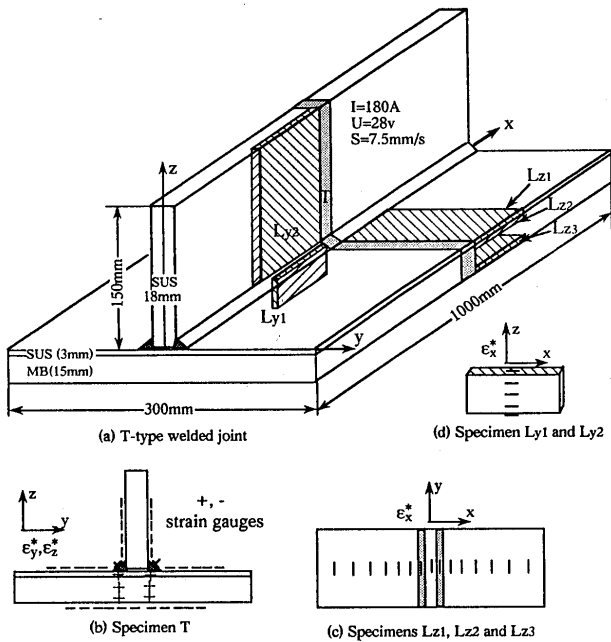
A T-type fillet weld of SUS/MB plate and SUS plate, and specimens for welding residual stress measurement
